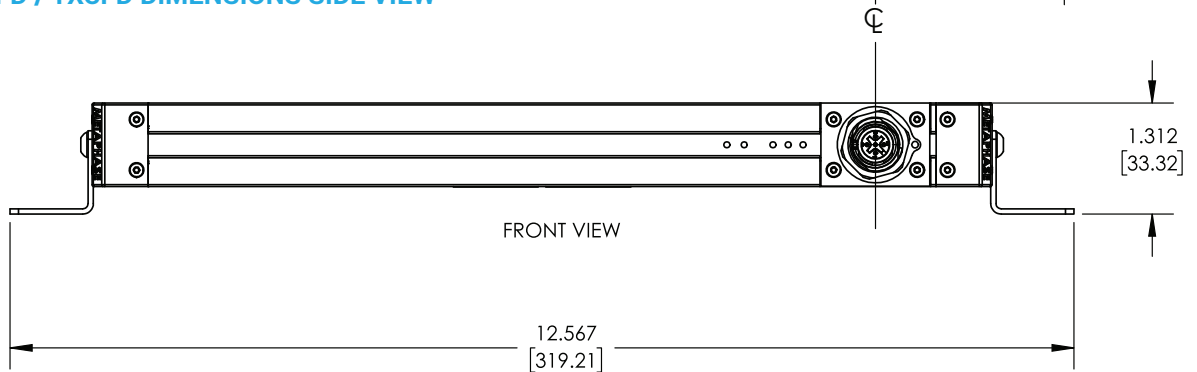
TXFD / TXCFD DIMENSIONS SIDE VIEW
